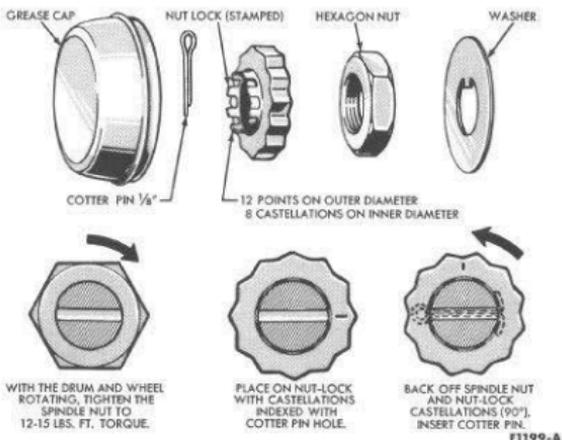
Front Wheel Spindle Nut Installation and Adjustment
